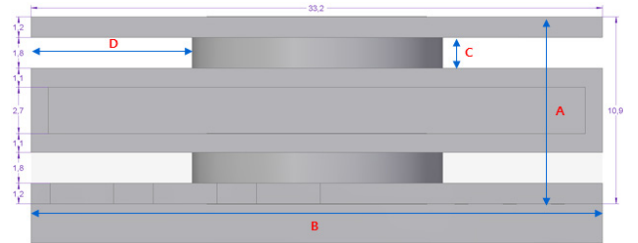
Bobbin shape of high frequency LLC transformer with 3oz PCB and copper plate windings.
